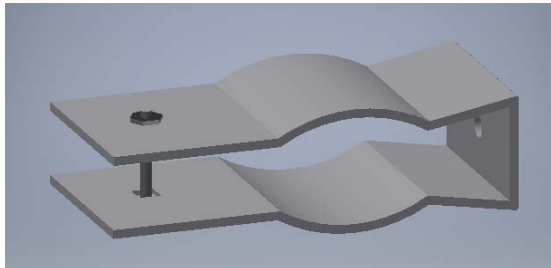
Clamp draft. Inventor Autodesk draft of clamp used to hold the fiber optic side glow cables.
